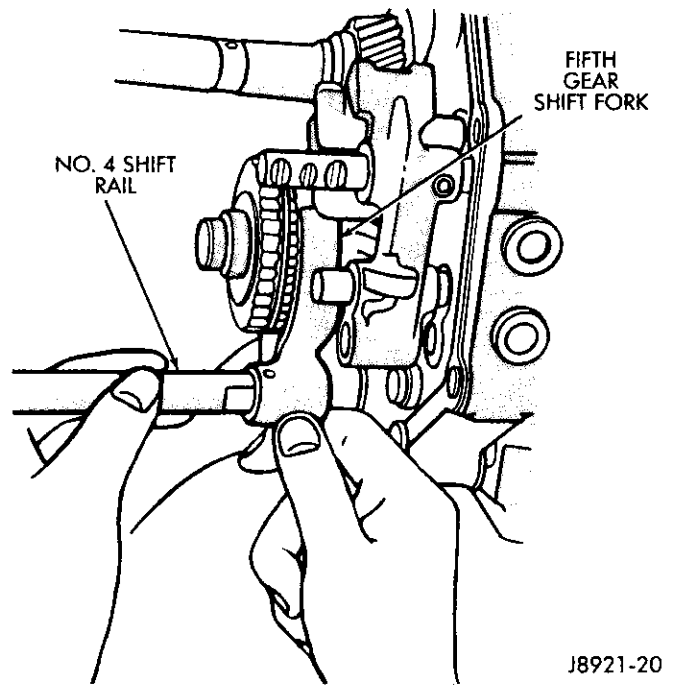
Removing No. 4 Shift Rail And Fifth Gear Shift Fork
